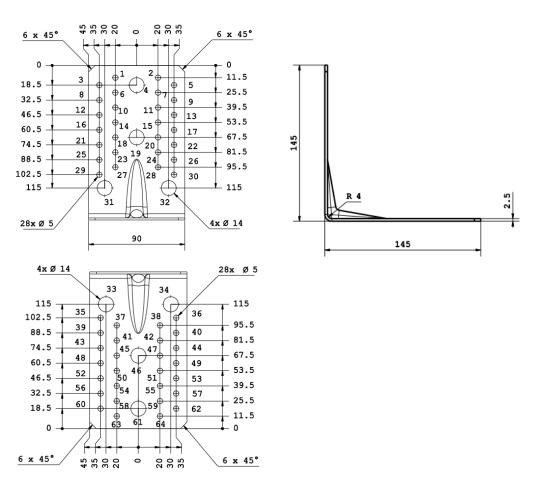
Dimensions of Angle Bracket 145 with rib, thickness 2,5 mm
